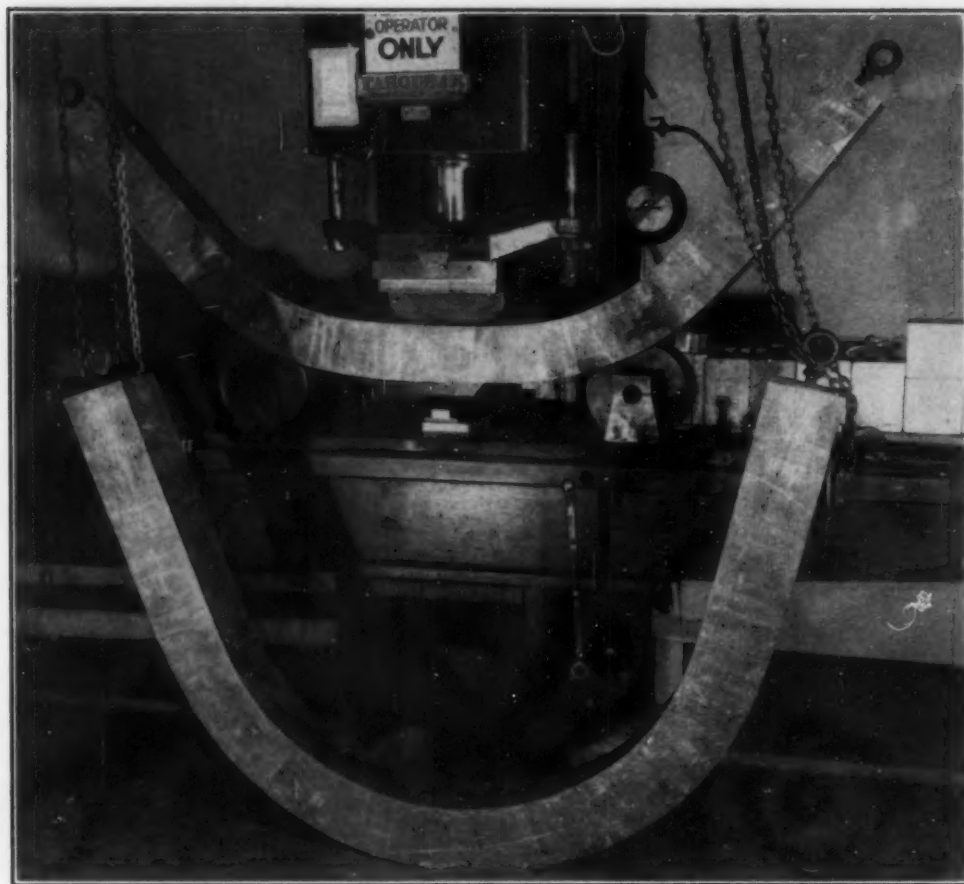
14S Hand Forgings Preheated to 600°F (315°C) in Air Furnace and Formed on Hydraulic Press.
